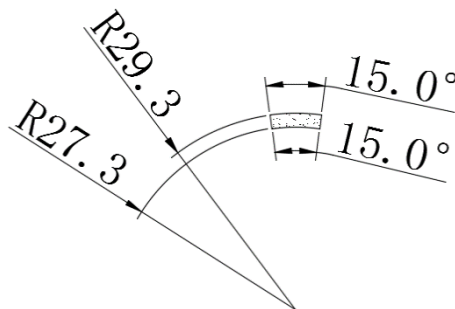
PM dimensions for 12/14 CPM-FRPM machines.
